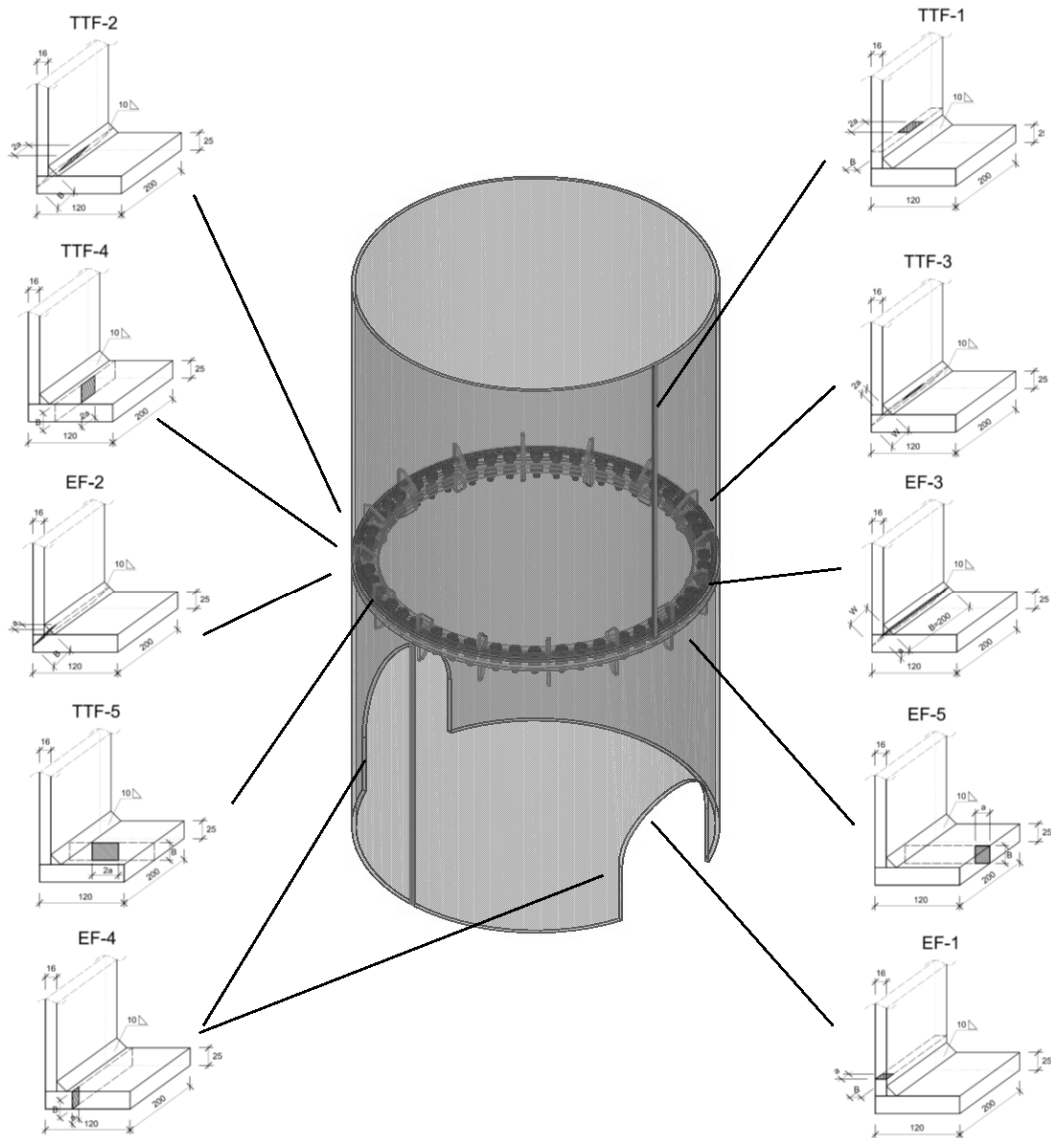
Typical flaws in a steel shell element and steel shell element joint
